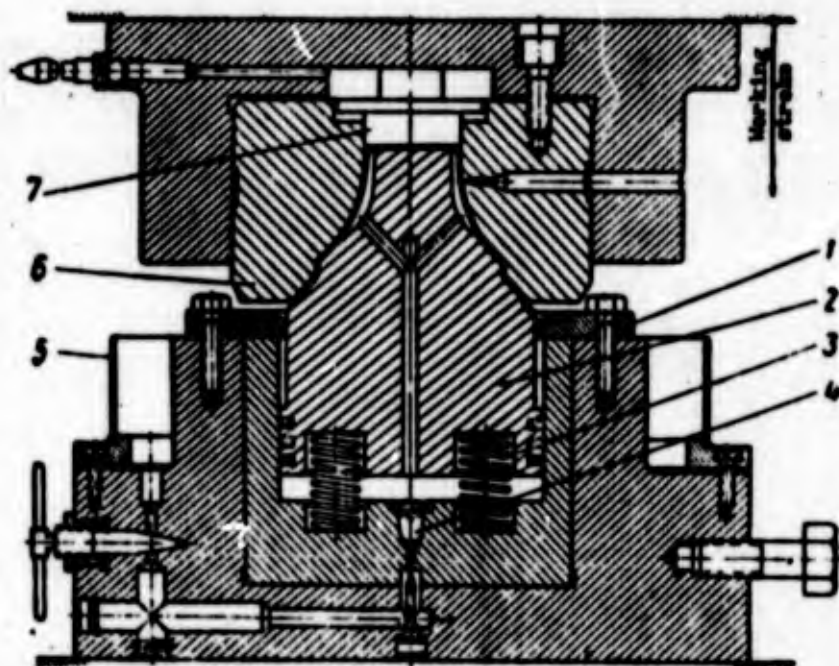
Stamp for hydraulic stamping of intake cone of combustion chamber.
